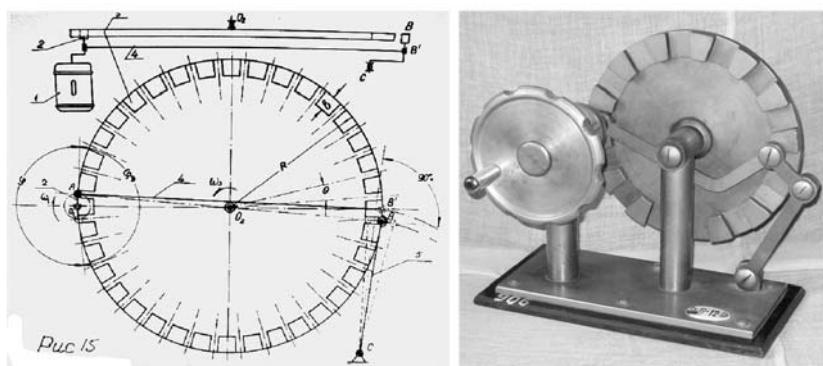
A multi-position Geneva cross-mechanism of a joint-lever lock controller
